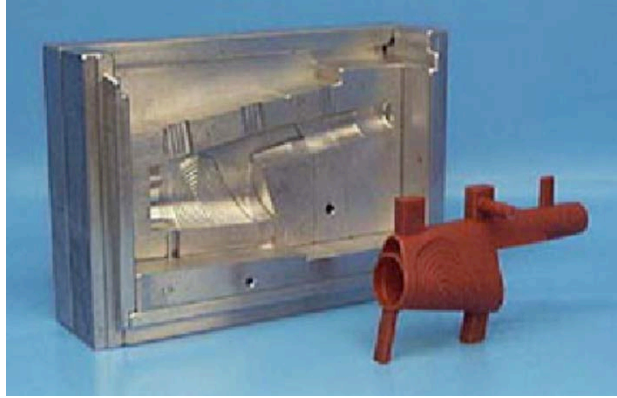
Die for molding wax patterns. This is half of a die used to cast wax patterns. The hollow in the wax pattern is formed by a dissolvable ceramic core [Alcoa].
